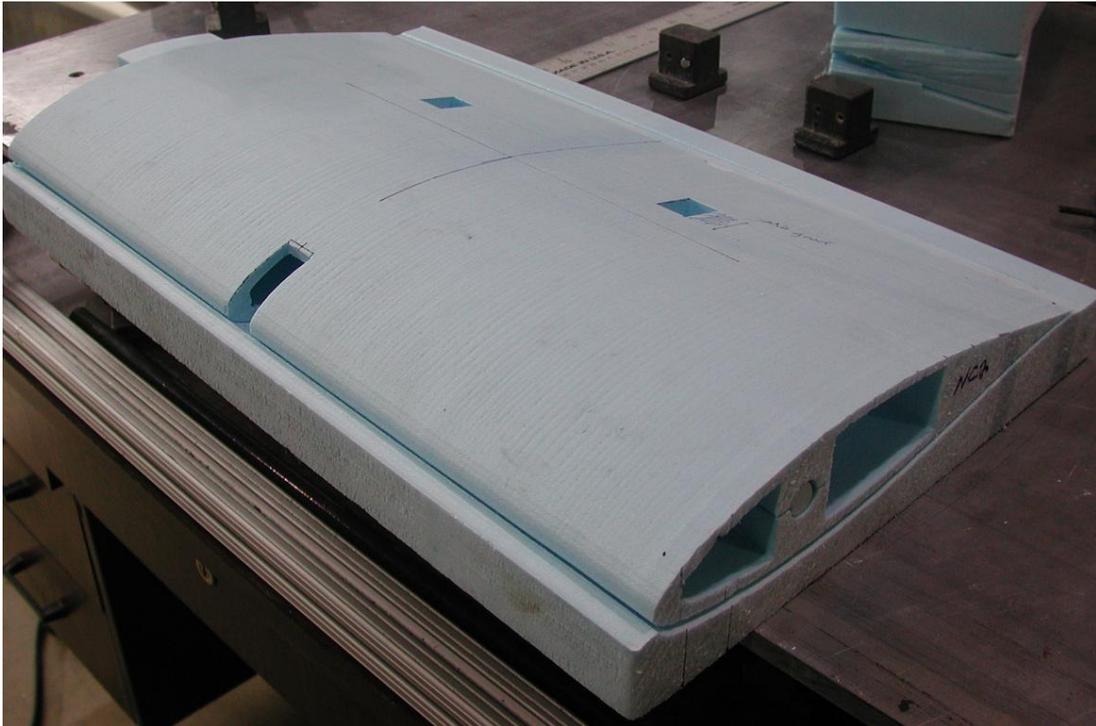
Bare Foam Wing Center Section – all cuts completed.
